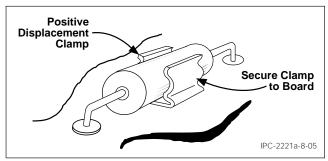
Clamp-Mounted Axial-Leaded Component
